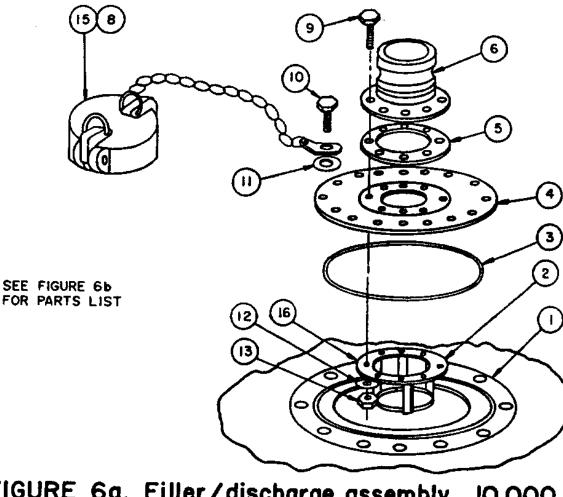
Filler/discharge assembly, 10,000, 20,000 and 50,000 gal tanks.
